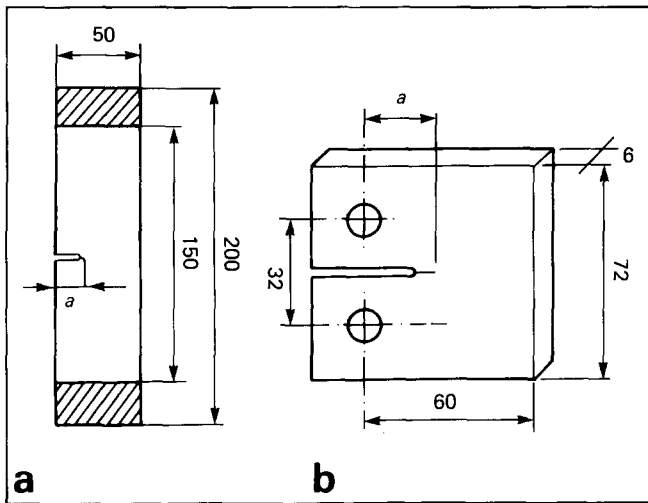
Geometry and dimensions (in mm) of: (a) single edge-notched and (b) compact tension specimens
